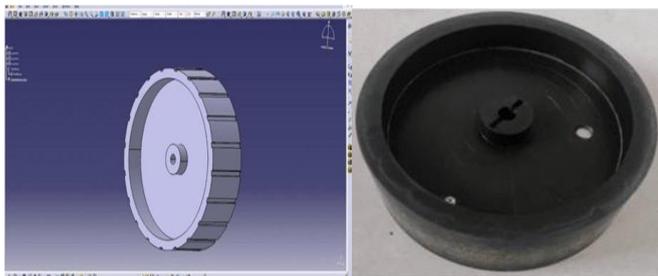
CAD Model of Wheel Fig -8: Actual Wheel
